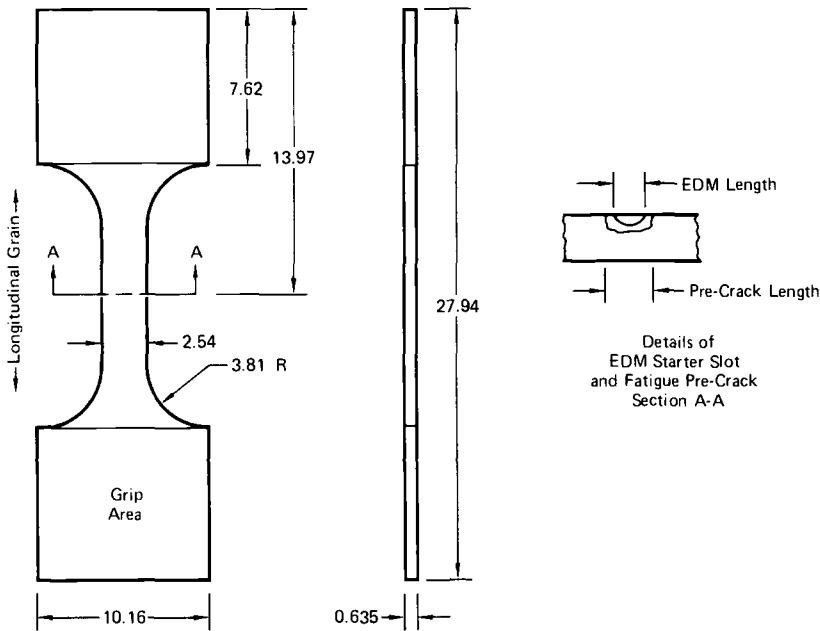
Surface-flawed panel specimen (dimensions in centimetres).
